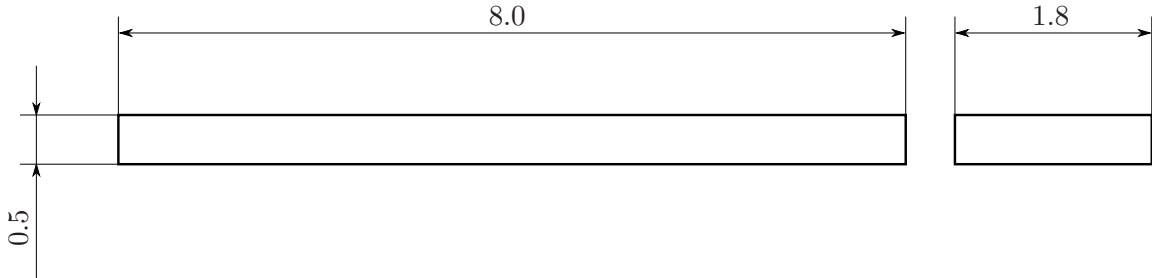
Drawing of the undamaged sample, all dimensions in inches
